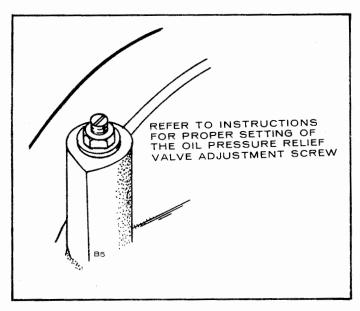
OIL PRESSURE RELIEF VALVE ADJUSTMENT
